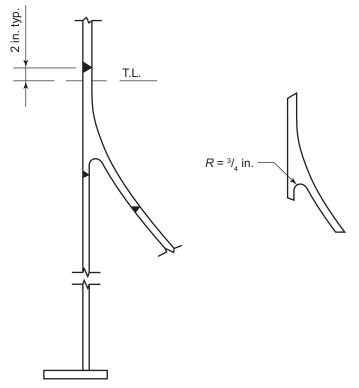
Forged Skirt-to-Shell Attachment Detail Removes Welds from High Stress Areas
